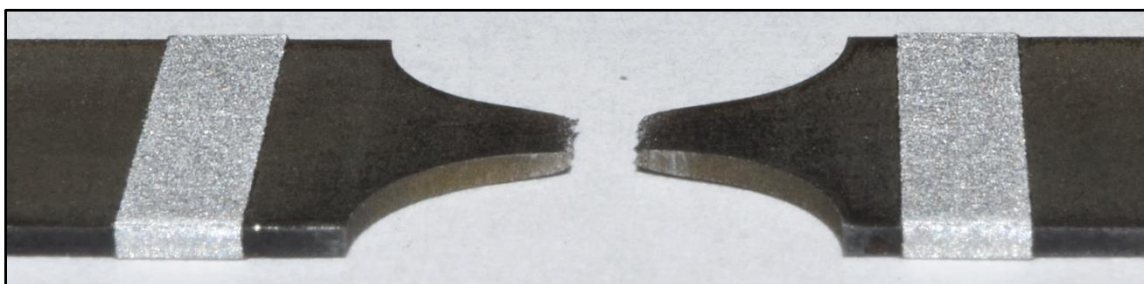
Large Notched Flat Specimen: Macro View of Typical Failure Zone
